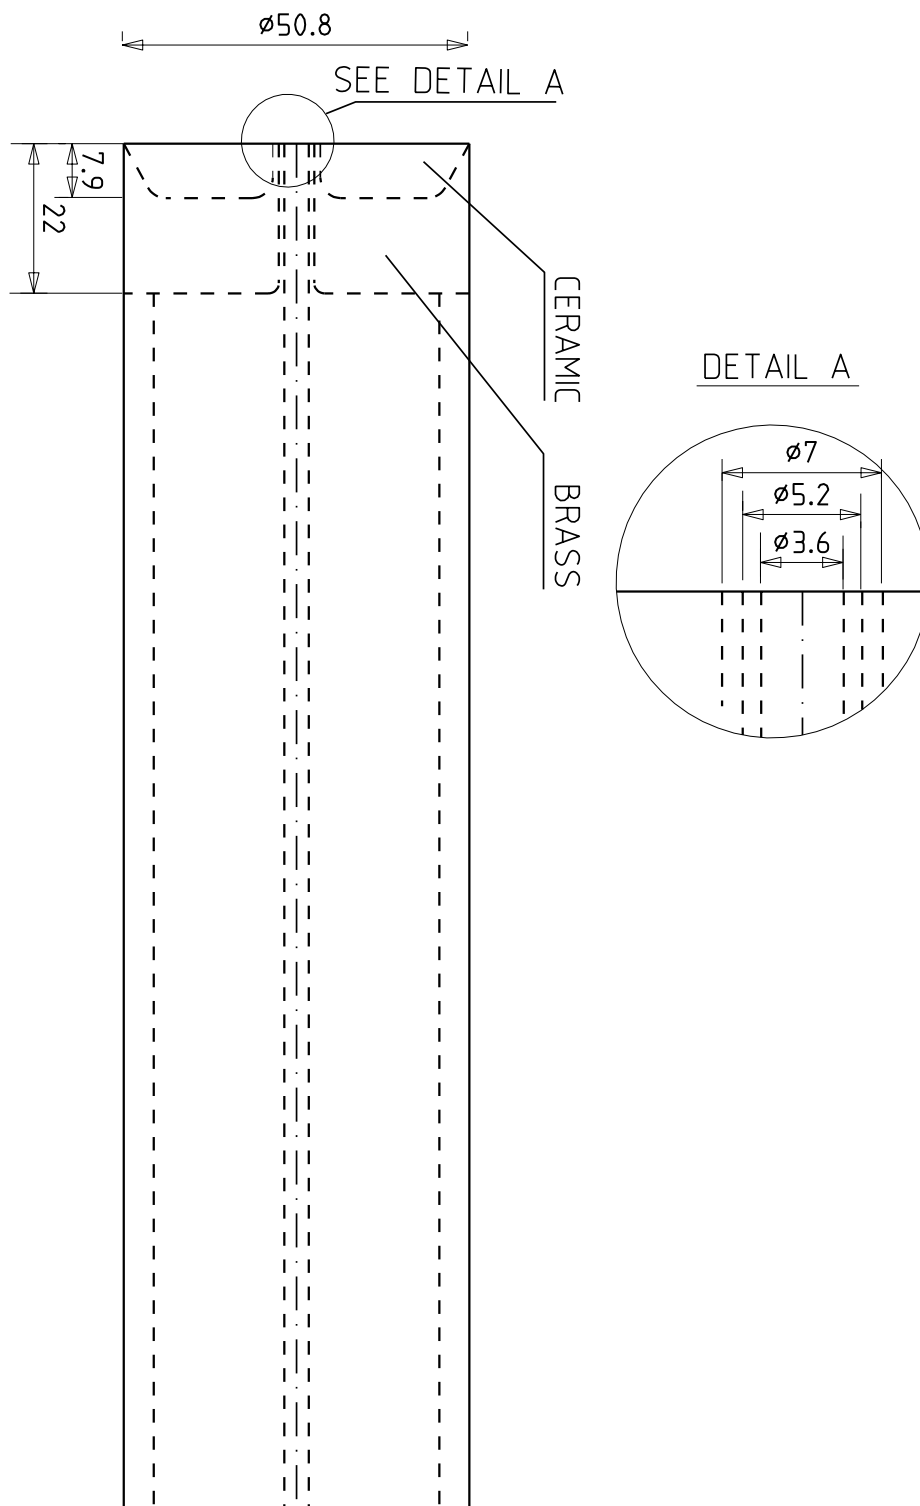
Detailed engineering drawing of the top section of the bluff-body burner.
